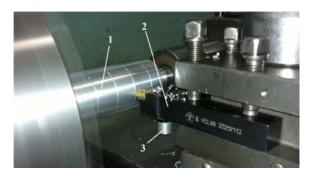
Experimental setup of machining process: 1- workpiece, 2cutting tool, 3- piezoelectric accelerometer KD-35
